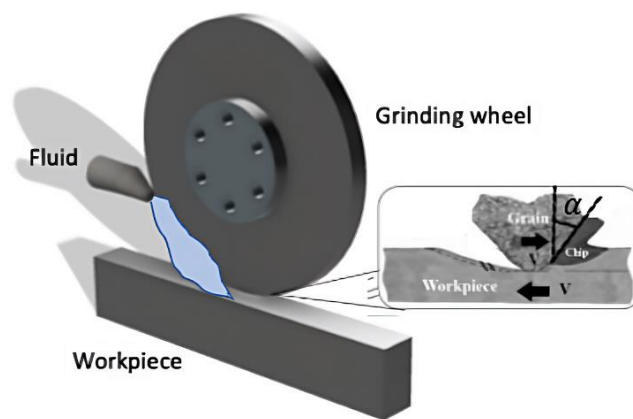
Schematic illustration of chip formation by an abrasive grit removing material from the workpiece during the surface grinding process.
